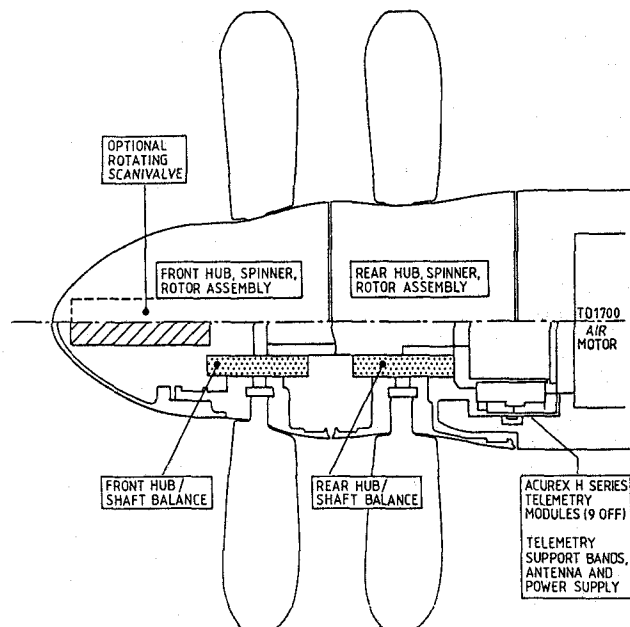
R8 FRONT AND REAR HUB ASSEMBLIES
